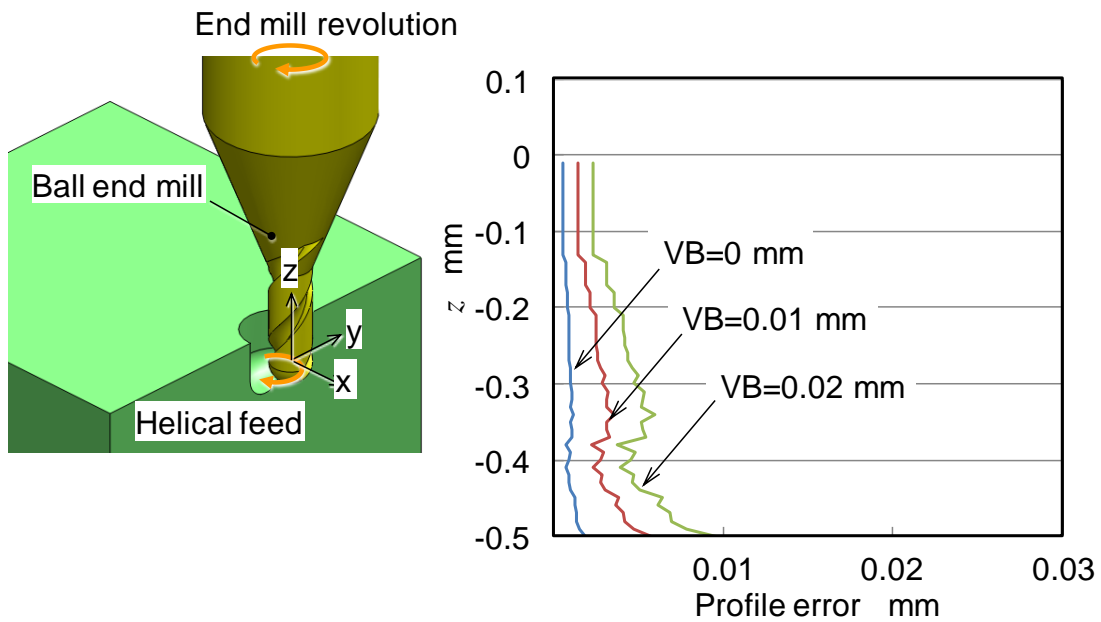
18 Profile error of the surface machined with a ball end mill in CW feed direction (Up milling).
